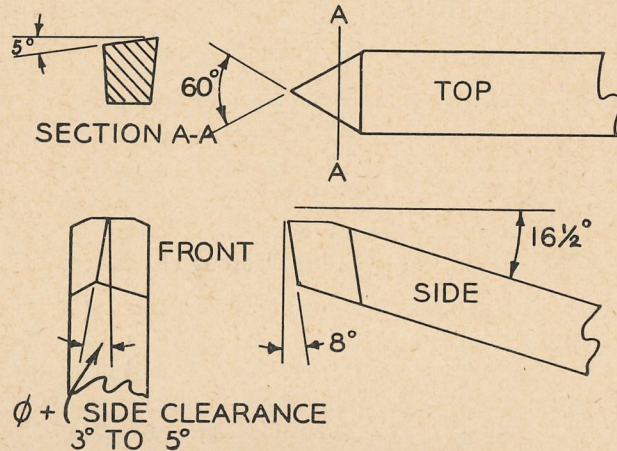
Tool for cutting 60° type threads. Fig. 40 explains how angle ϕ must be determined.
